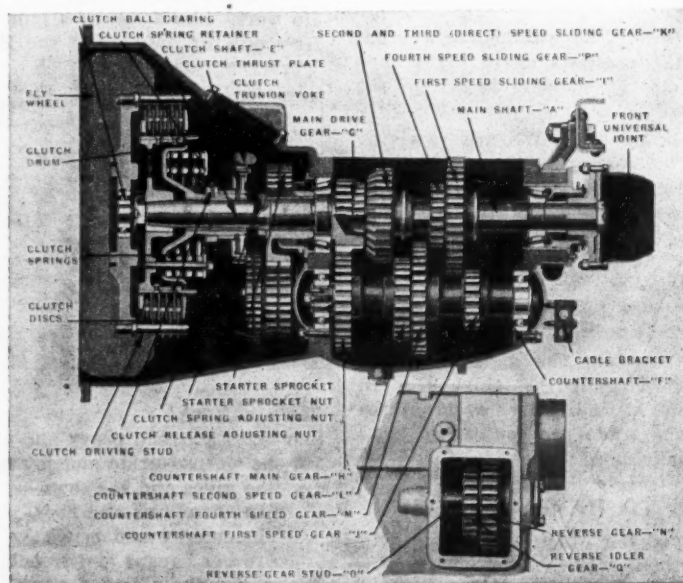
Sectional view of transmission and clutch on Lozier 84
